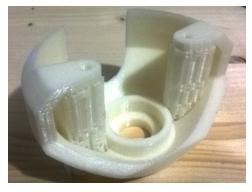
Top part of the extruder - 3D printed in ABS, with same material support
